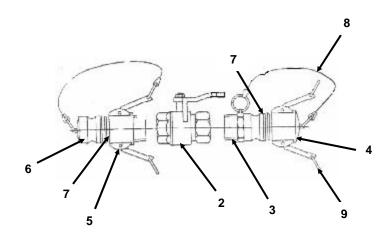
Filler/Discharge Ball Valve Assembly (Reliance and MPC Models)
